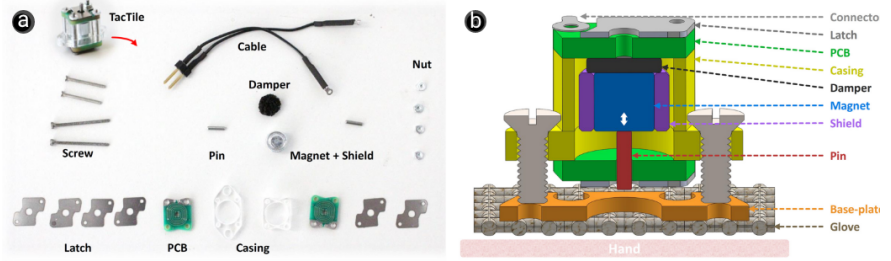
TacTiles parts and structure. A) Pre-assembly view of the TacTiles parts and B) schematic of TacTiles assembly.
